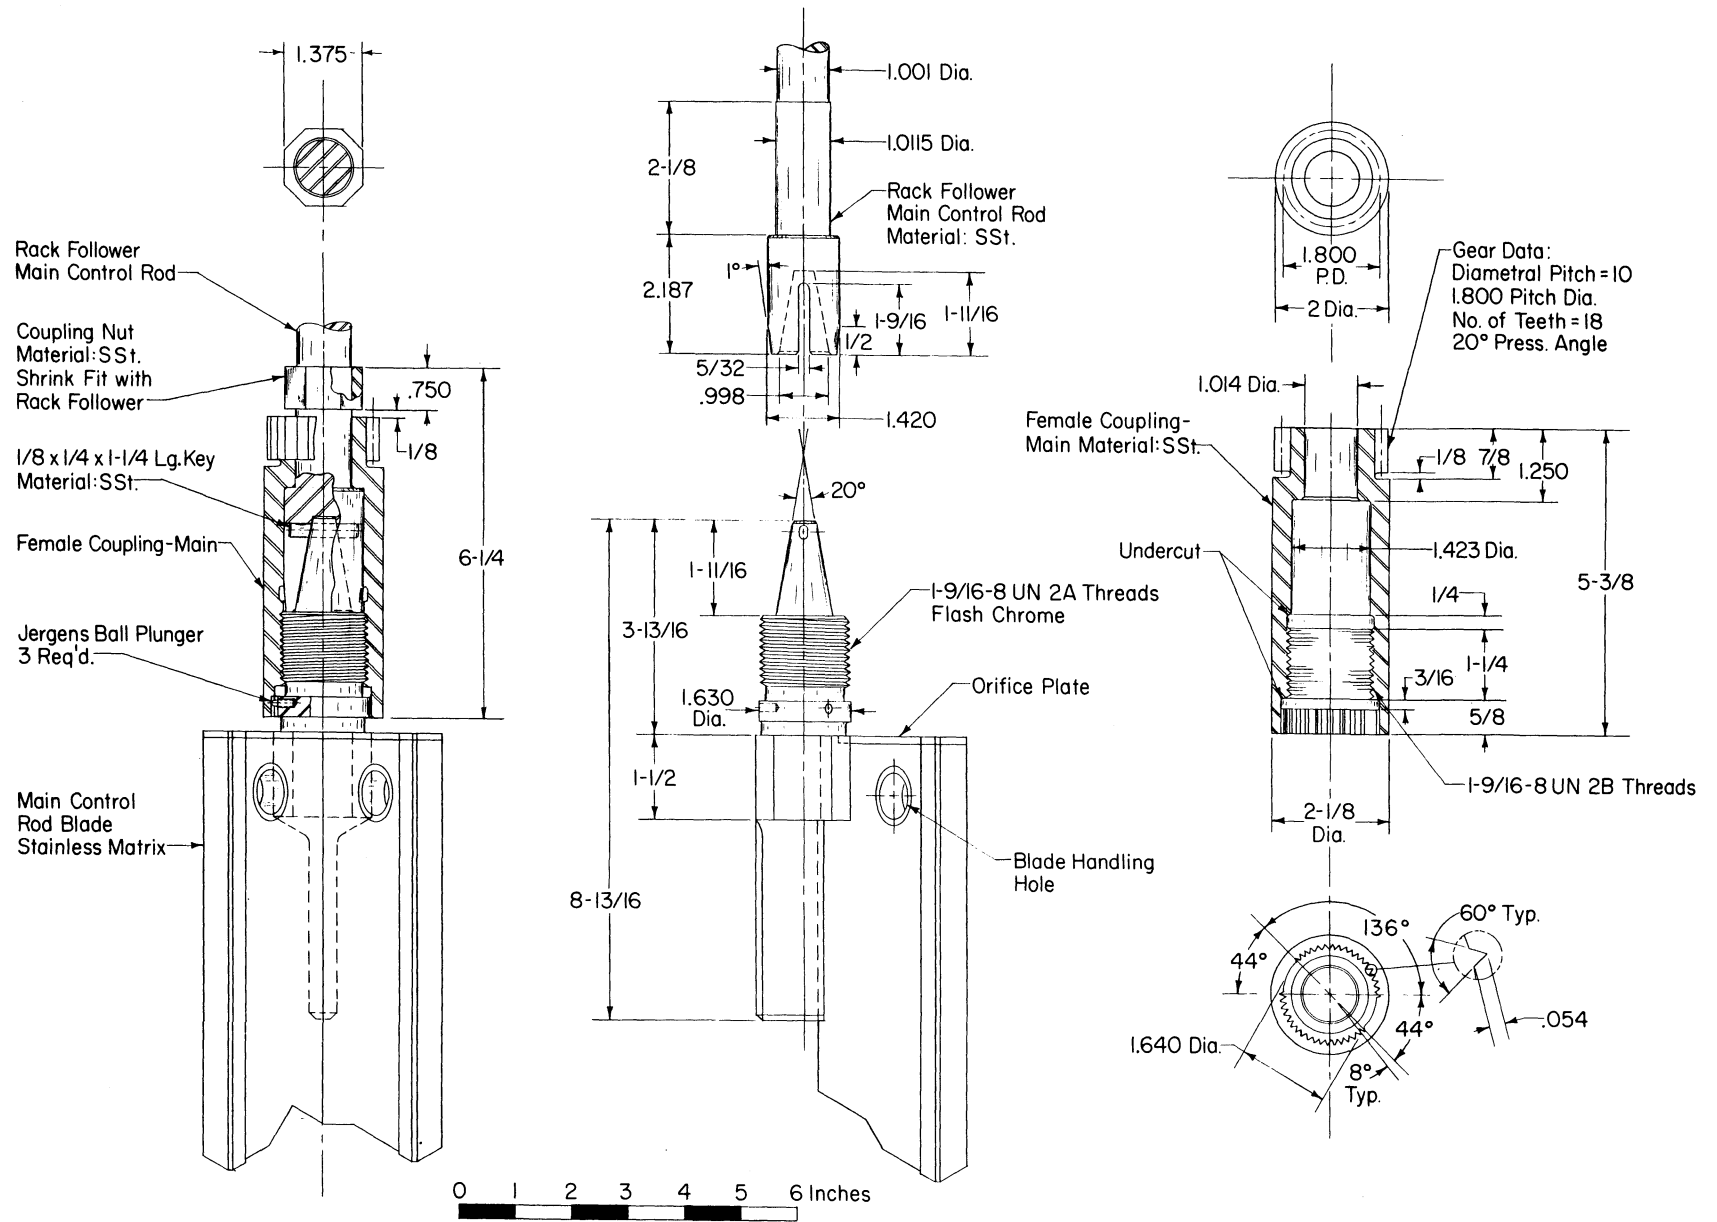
Details of the coupling between the main control rod blade and the drive mechanism rack follower.
